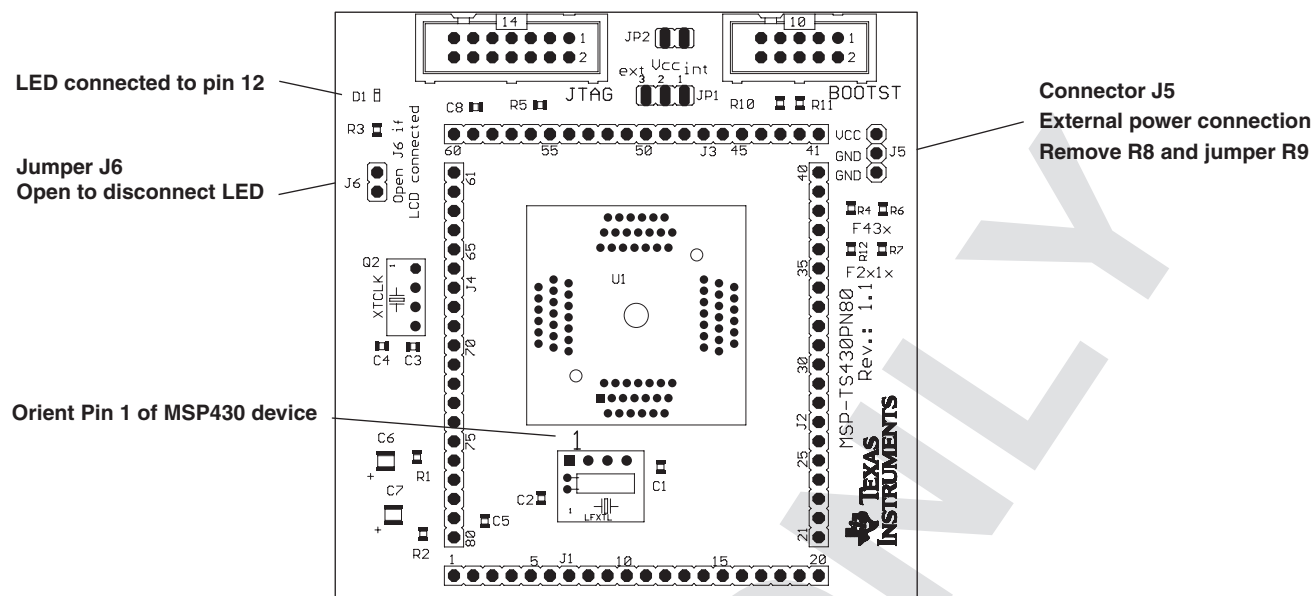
MSP-TS430PN80 Target Socket Module, PCB
